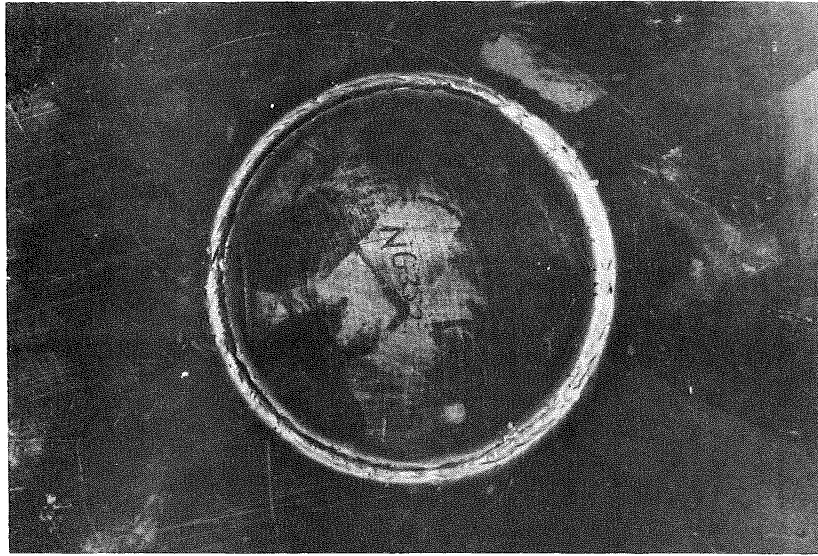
A 4 inch sample core electron beam welded into a A-36 steel plate.
